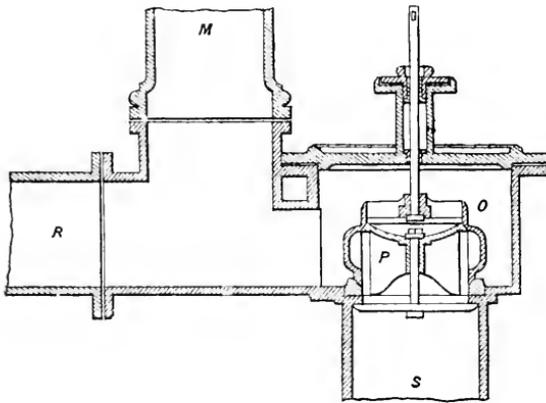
ENLARGED VIEW OF THE EQUILIBRIUM VALVE.
